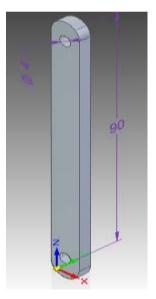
Isometric view of Link 1 with the dimensions
